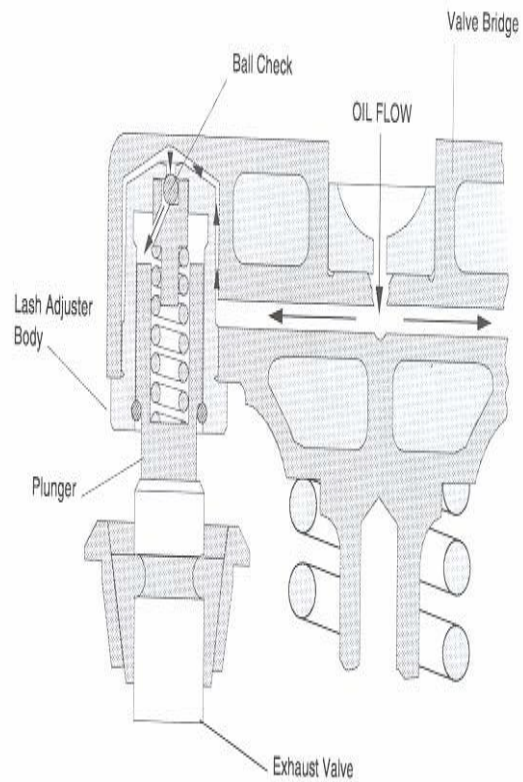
Valve Bridge / Lash Adjuster Cross Section
